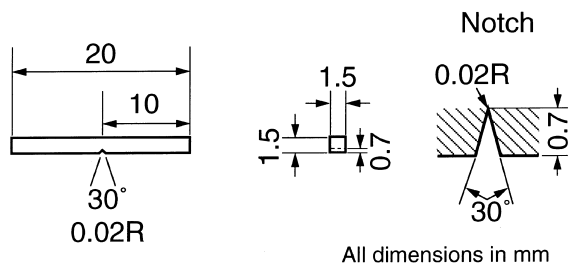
Dimensions of the miniature Charpy V-notch impact test specimen.
